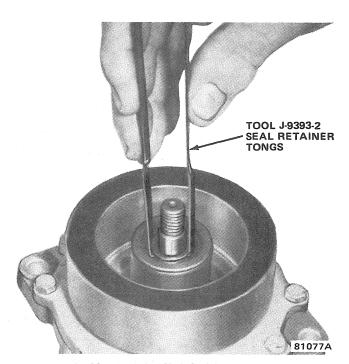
E-28 Removing Shaft Seal Seat Using Tongs
